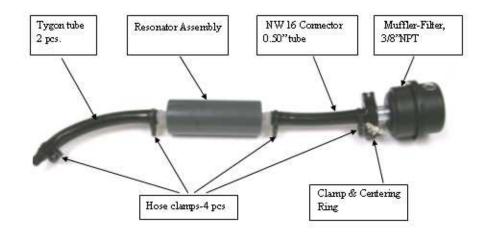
SH-110 Exhaust Silencer Kit: Components
